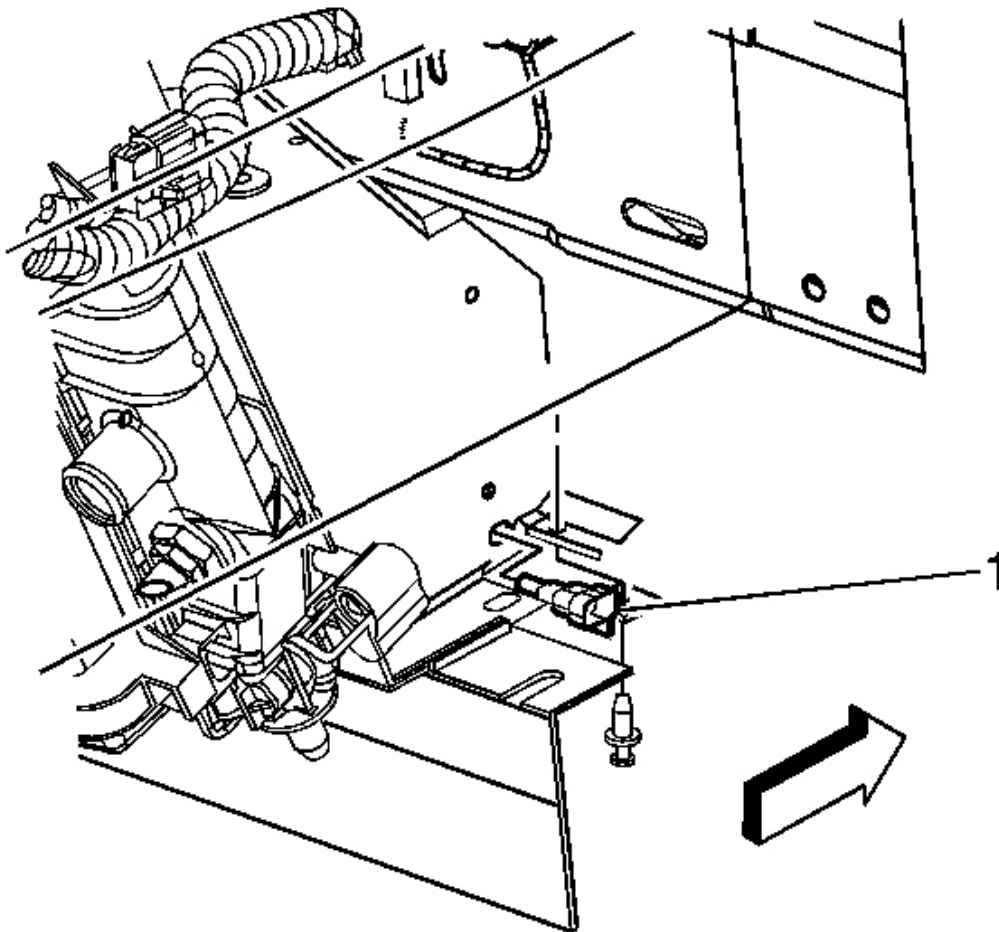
Identifying Ambient Air Temperature Sensor & Electrical Connector At Radiator Support
